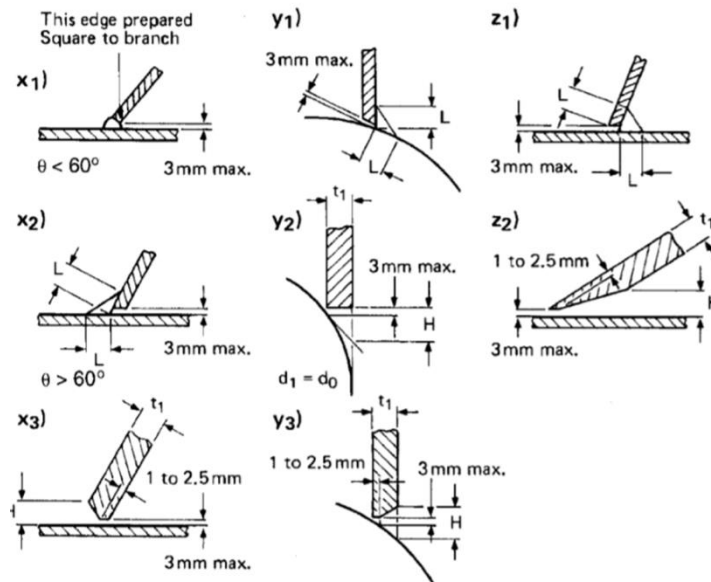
Fillet weld and butt weld recommendations [1]
